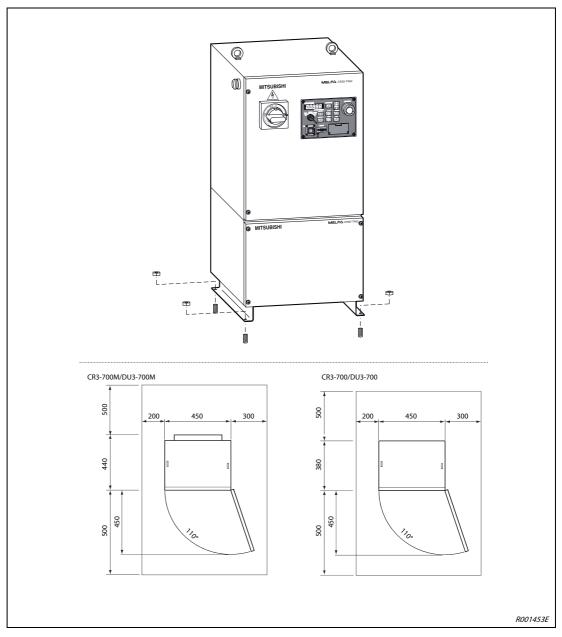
Set up control unit CR3D and drive unit DU3
